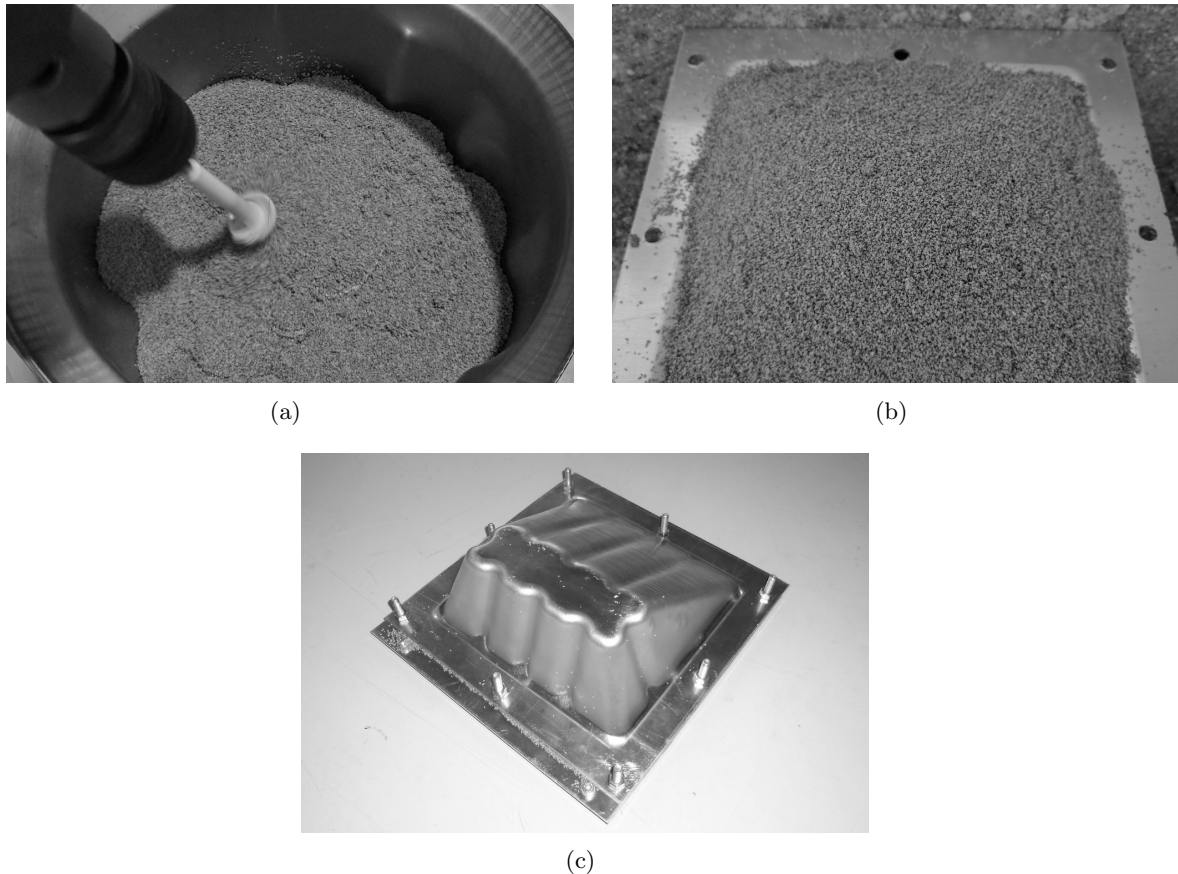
Cork compression moulding with simplified SPIF sheet metal mould: (a) cork mixture preparation; (b) cork mixture inside mould cavity; (c) closed mould
